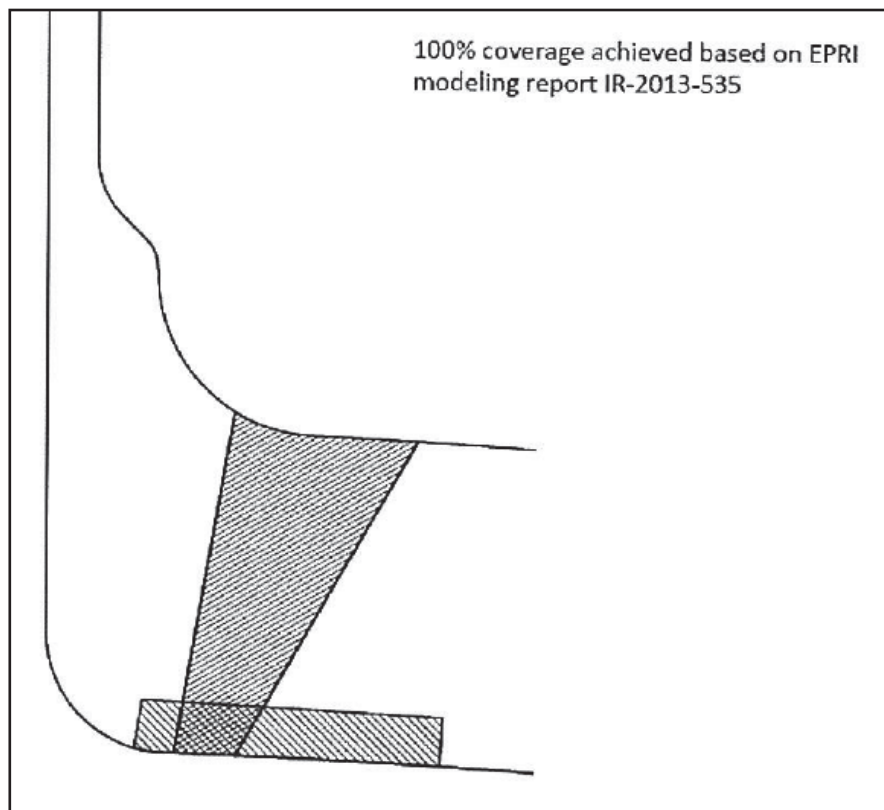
Weld N7-NV, Lower 15% Coverage
